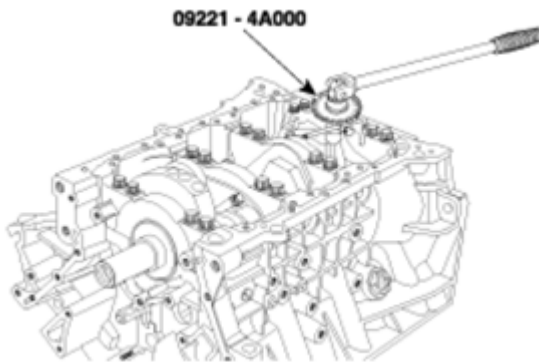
Installing Connecting Rod Bearing Cap Bolts Using SST (09221-4A000)
